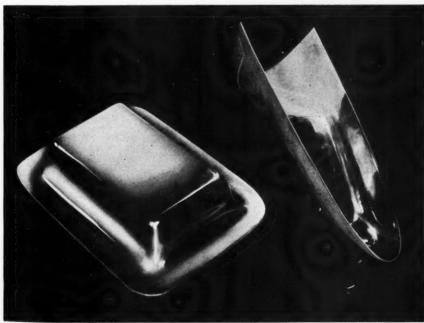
Metal-sprayed molds produced from phenolic matrices, employed to produce complex aircraft shapes
